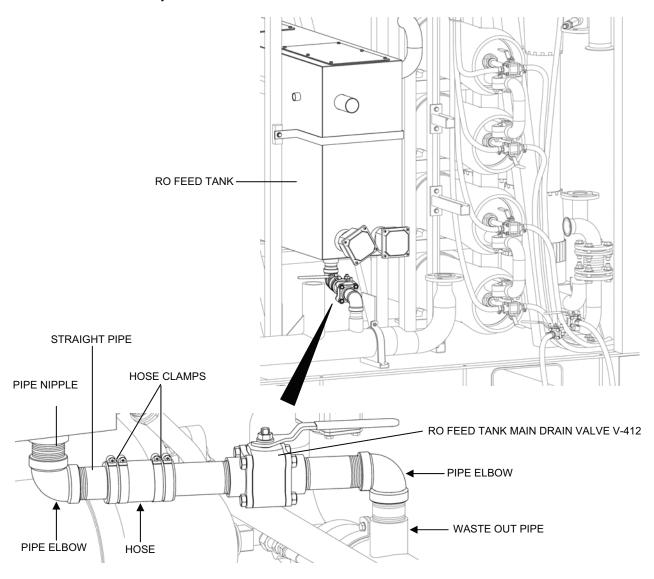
RO Feed Tank Drain Pipe Assembly Removal.
